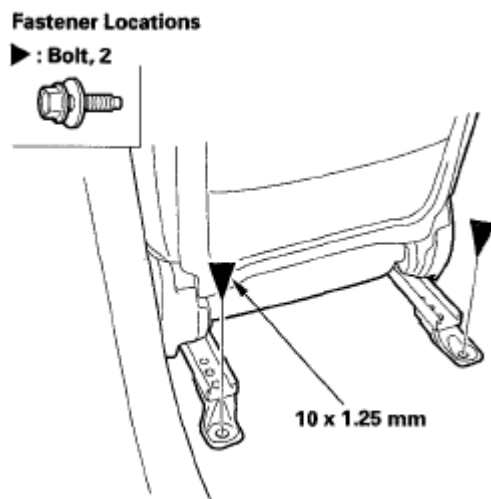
Identifying Rear Outer Seat Track End Cover Bolts
